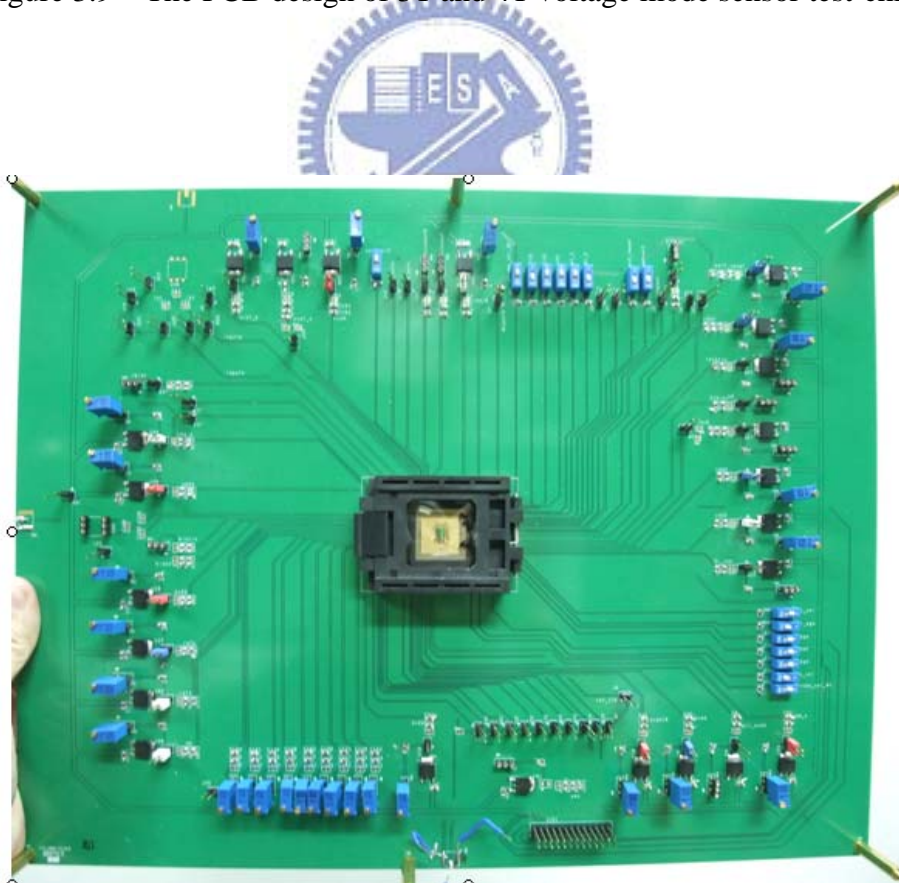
The PCB design of 3T and 4T voltage mode sensor full-chip
